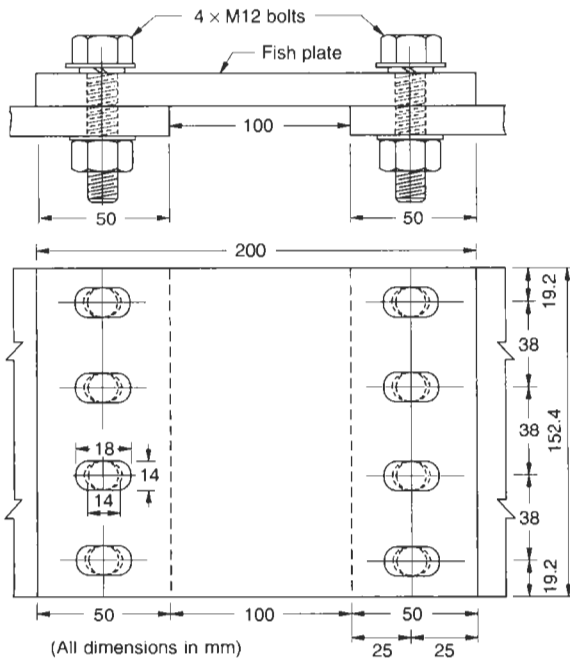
Another arrangement for jointing two sections of a busbar through a fish plate
